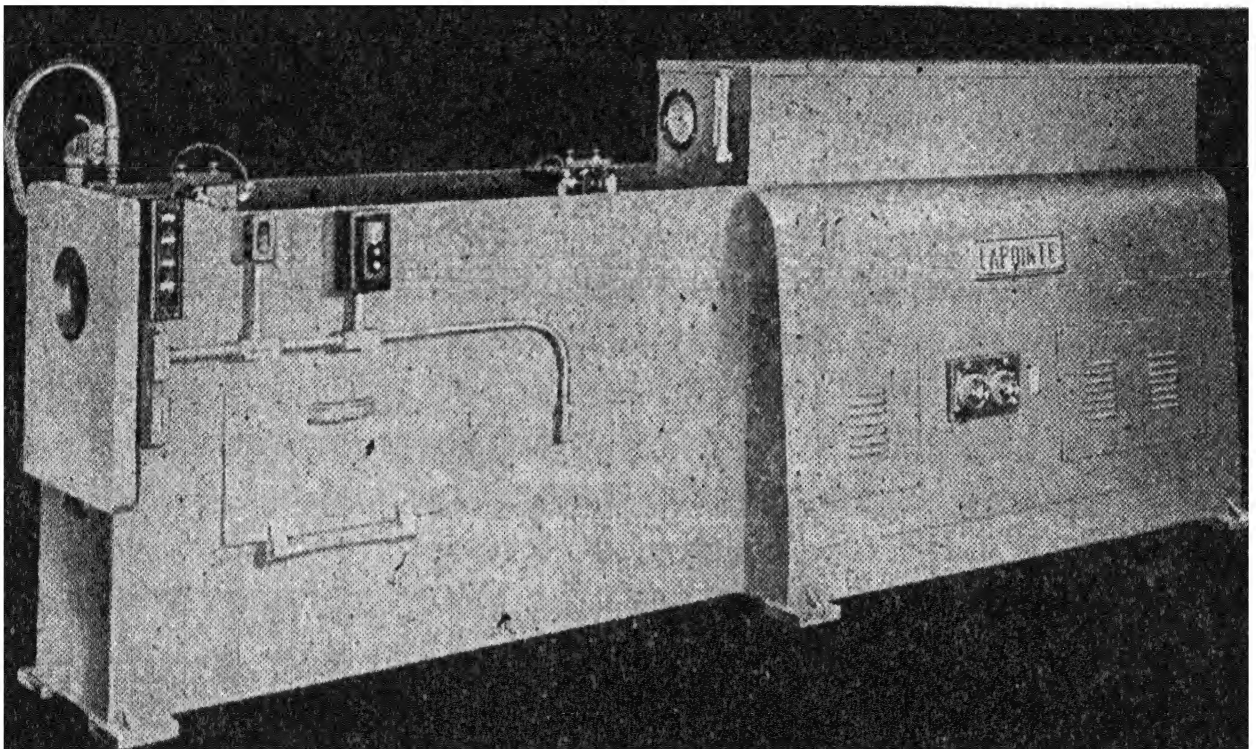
Lapointe Machine Tool Company. Type HP-30, horizontal hydraulic broaching machine. (Capacity, 15 tons; stroke, 52 inches.)
